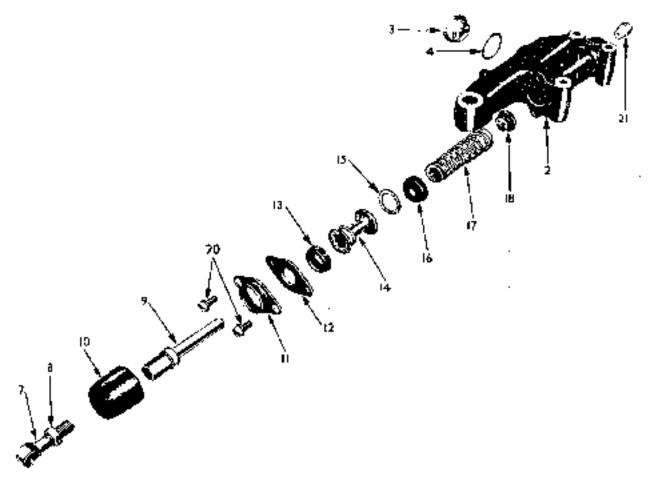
Brake Master Cylindor (Disassembled View) (1942 Model)
